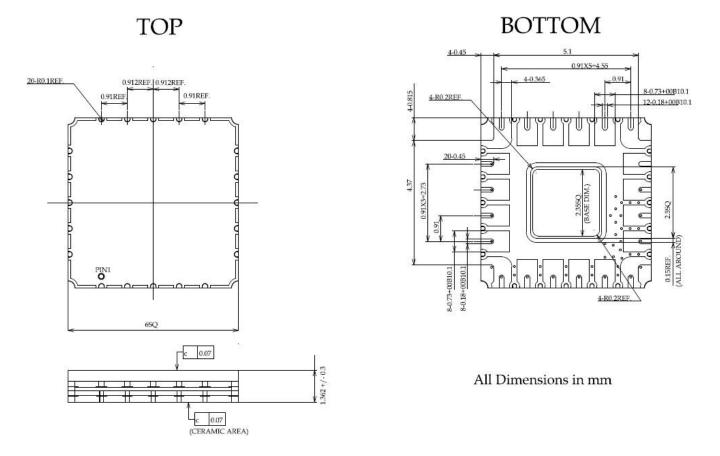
CQFN44 Package Drawing (All Dimensions in mm)
